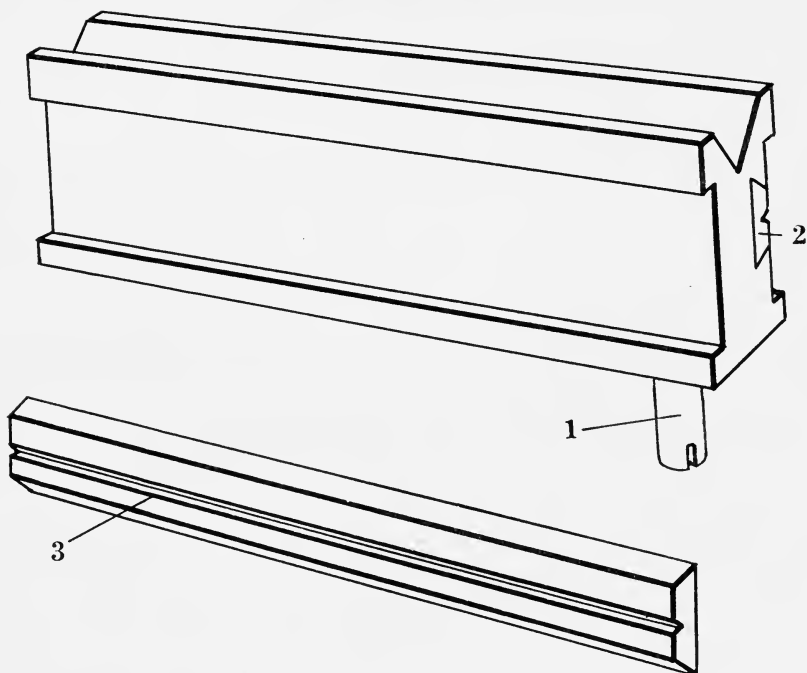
Matrix Slide Block in position as it appears when inserted in the first-elevator jaws for the purpose of casting rule or border slugs. Below the block is shown a matrix slide (in reverse position). This slide, containing the rule or border pattern, fits into the slot 2 of the block. The rule or border pattern is punched in the slide at 3.
